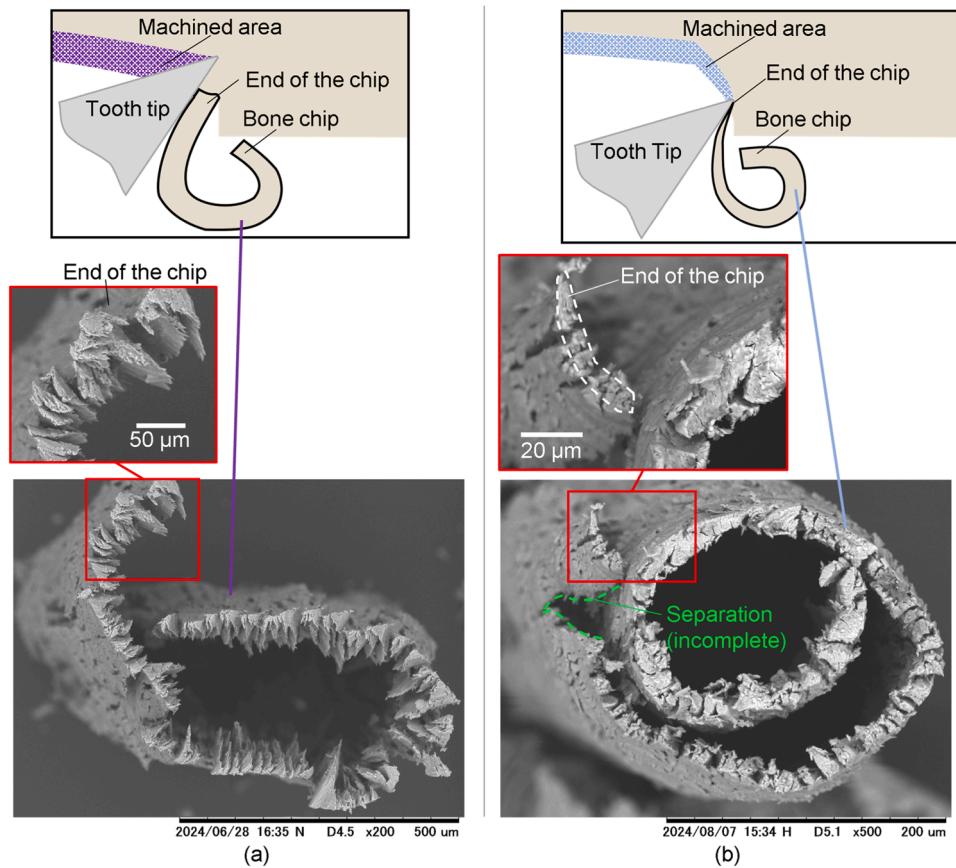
Side view of the bone chips generated in the side stopped groove cutting experiments. (a) Conventional mechanism. (b) Proposed mechanism.
